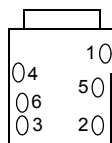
The bottom view of 2.5mm audio jack (J18)
